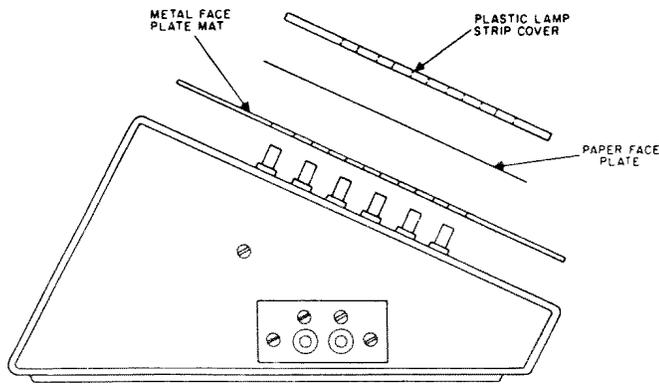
Side View of Turret Face Assembly, Showing Order of Assembly.
